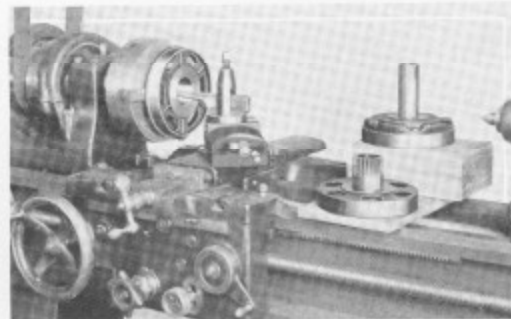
Boring a Ford Transmission Drum in the Lathe, held in an Independent Chuck and Using a Finger Boring Tool
